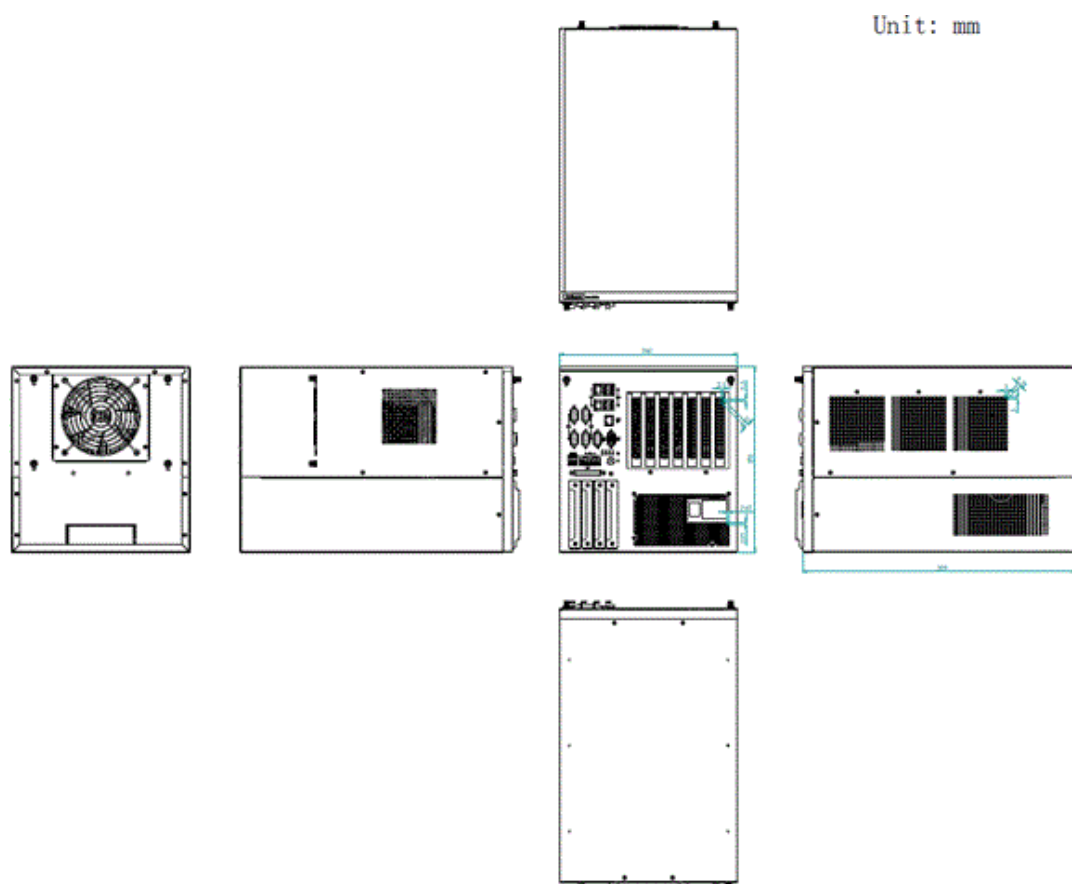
AIR-500D Mechanical Dimensions Diagram
